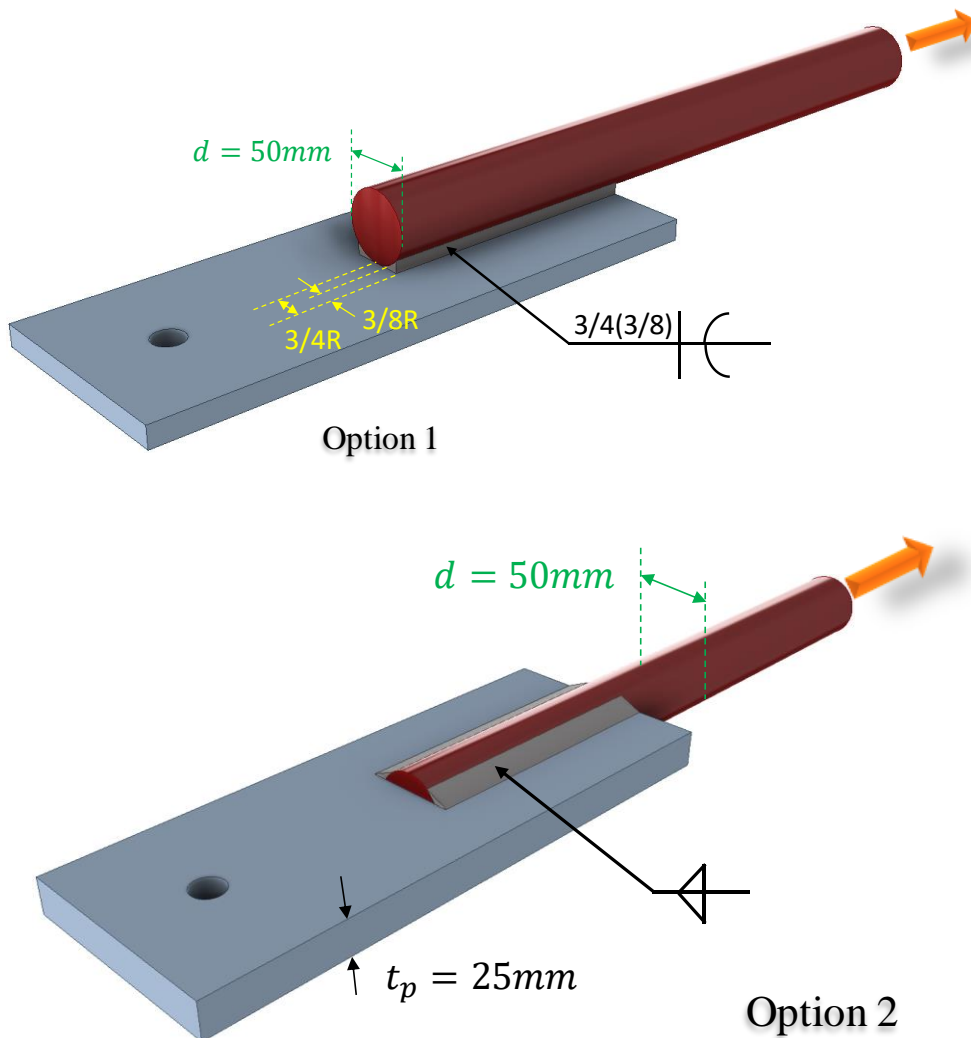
Welding of steel rod to a plate (a) Option 1: single sided flare groove weld (b) Option 2: double sided fillet welds (preferred)
